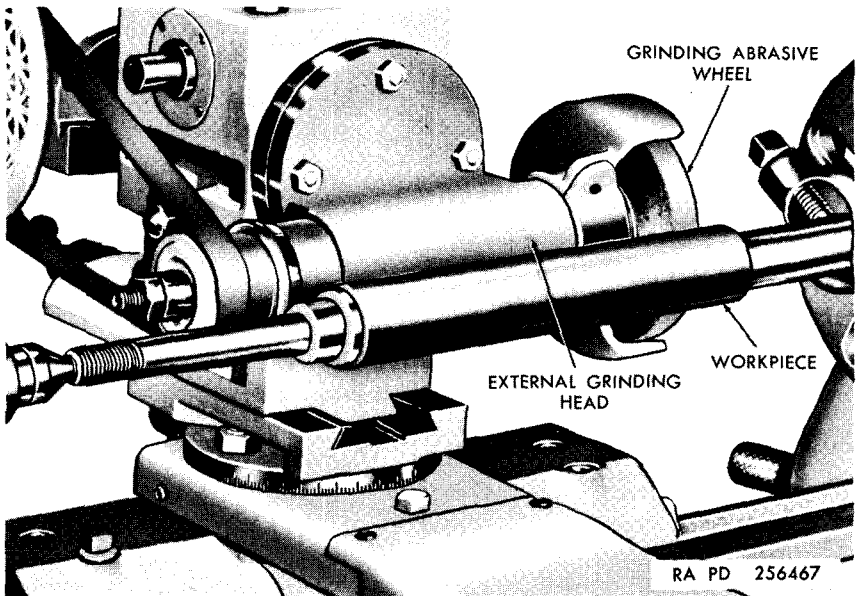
Plain cylindrical grinding operation, using milling and grinding lathe attachment.
